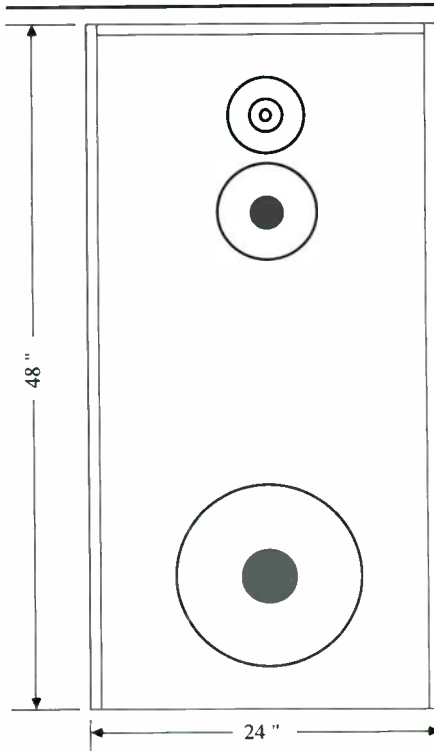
Front view of speaker showing 1" x 2" oak trim.
